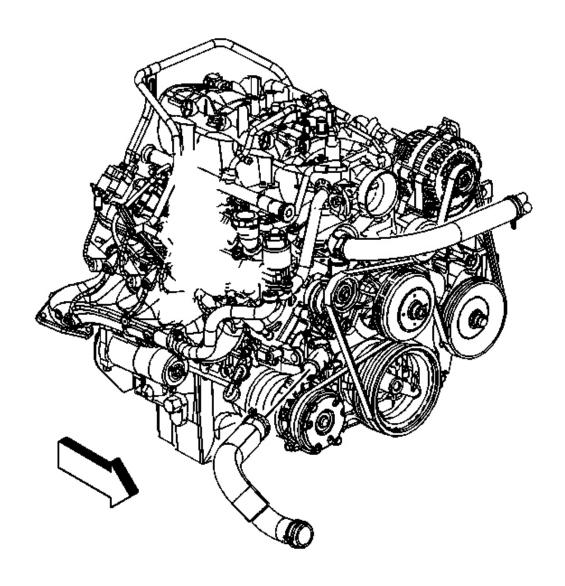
View Of Outlet Hose & Water Pump Courtesy of GENERAL MOTORS CORP.
